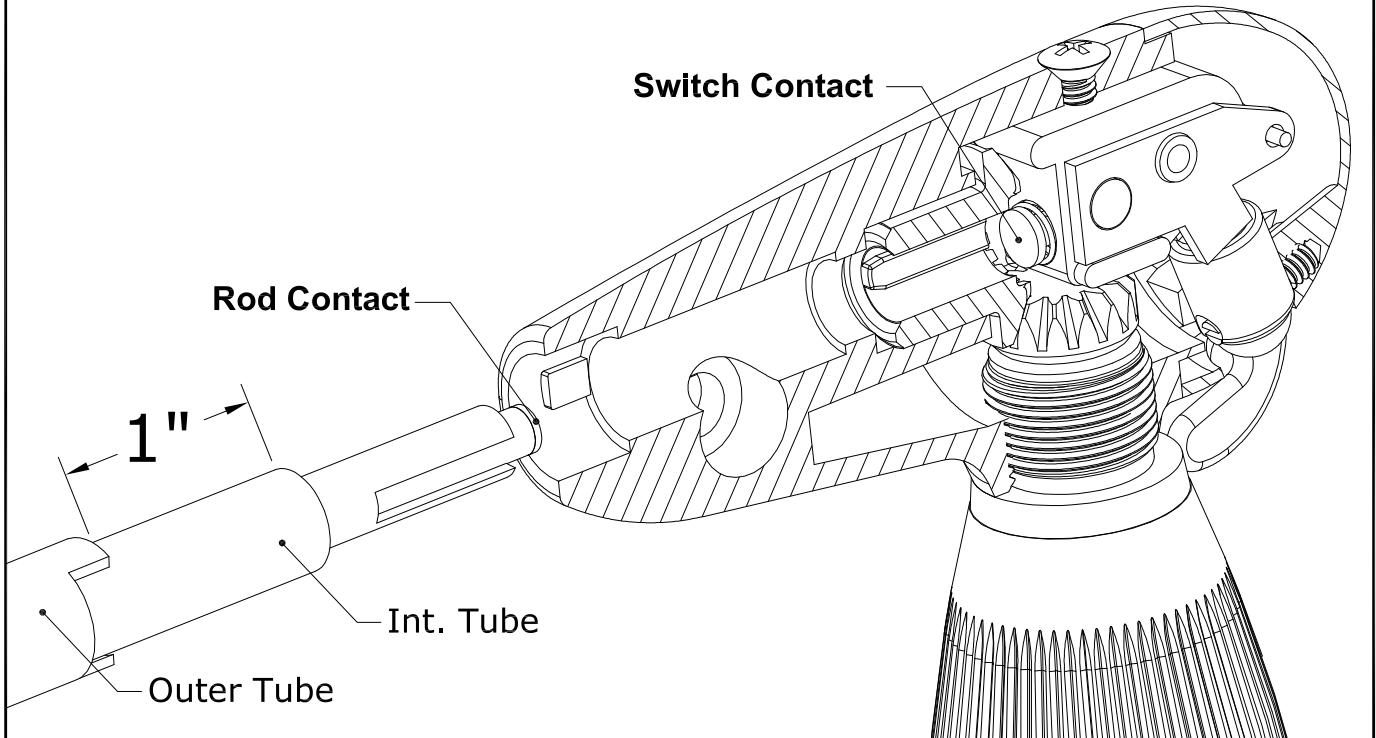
Check 1" Dimension between Outer Tube and Int. Tube Ends to Ensure Electrical Continuity between Rod and Switch Contacts
